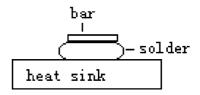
Solder without Au-sandwiched layer when the solder melts.
